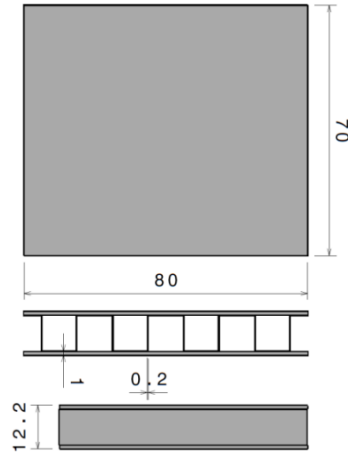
Geometrical details of metallic sandwich panel with square corrugated core (unit: mm)
